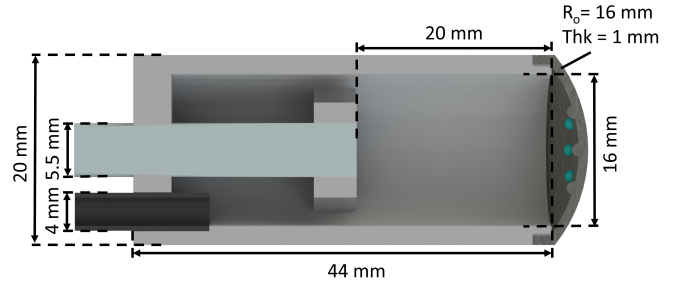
Dimensions and cross-sectional view of the PMOT sensor where the camera is highlighted in blue.
